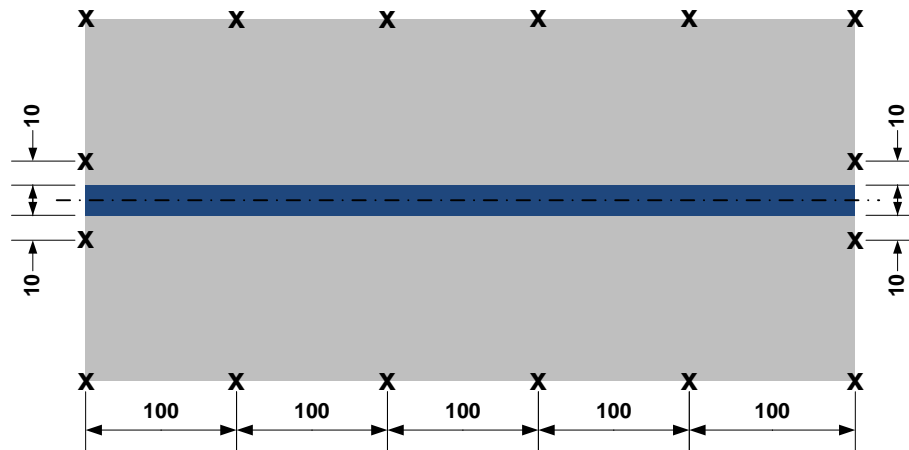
Distortion measurement pattern with Vernier calliper tool on a welded panel
